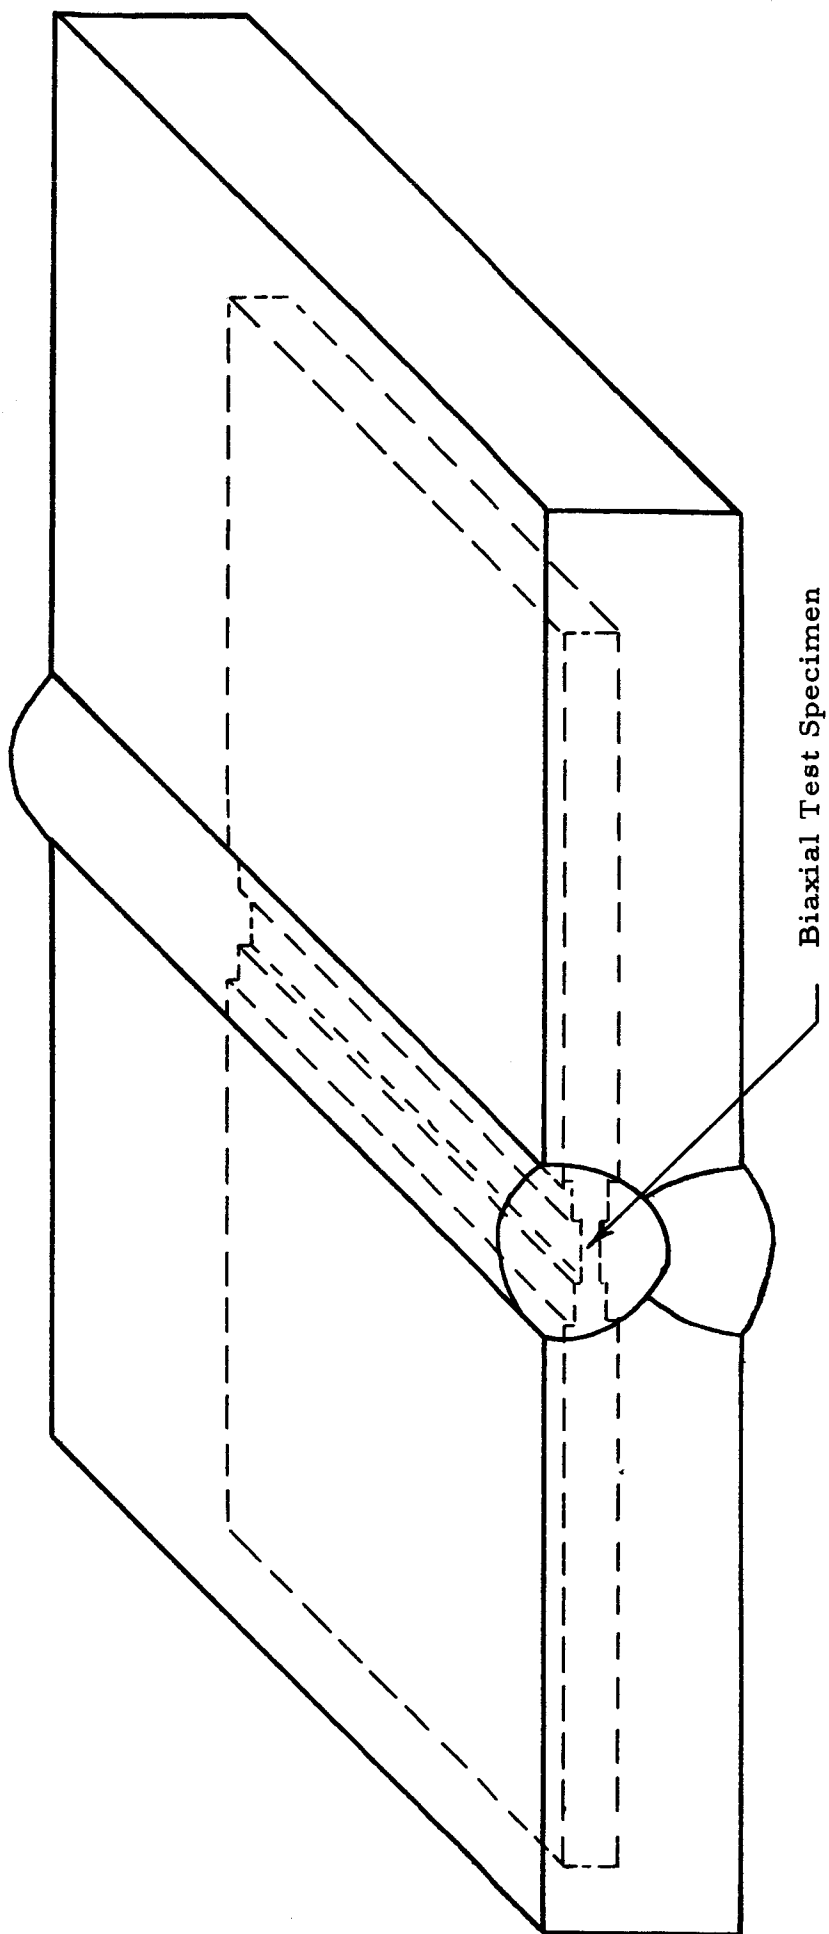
LOCATION FROM WHICH BIAXIAL TEST SPECIMENS WERE MACHINED
